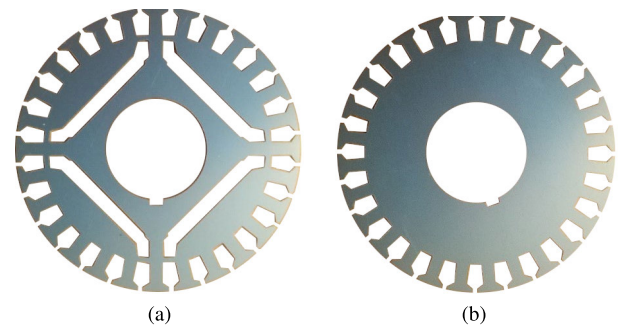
Lamination used to fabricate design DI: (a) the lamination for active stack part, (b) cover lamination. The cover lamination prevents aluminum to leak into the magnet cavity, and it is removed after die casting. Similarly, design DB and DC can be produced.
